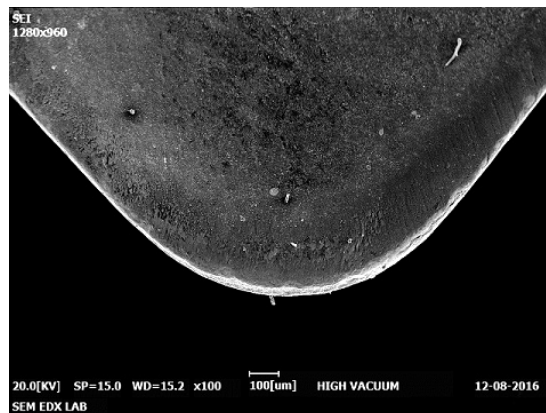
SEM Views of worn out inserts under cryogenic CO₂ condition with cutting length of 90 mm and machining duration 5 min (cutting speed-70.37 m/min and feed-0.150 mm/tooth)
